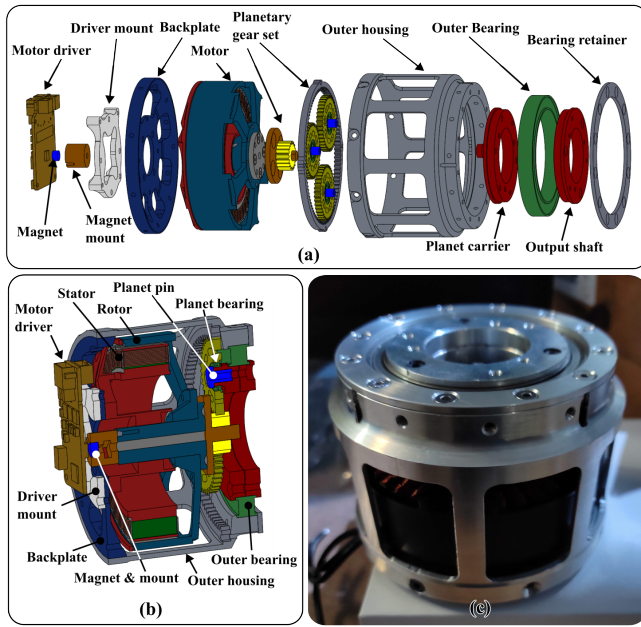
QDD Actuator: (a) Details of the actuator design; (b) Cross-section view of actuator; (c) Manufactured actuator
